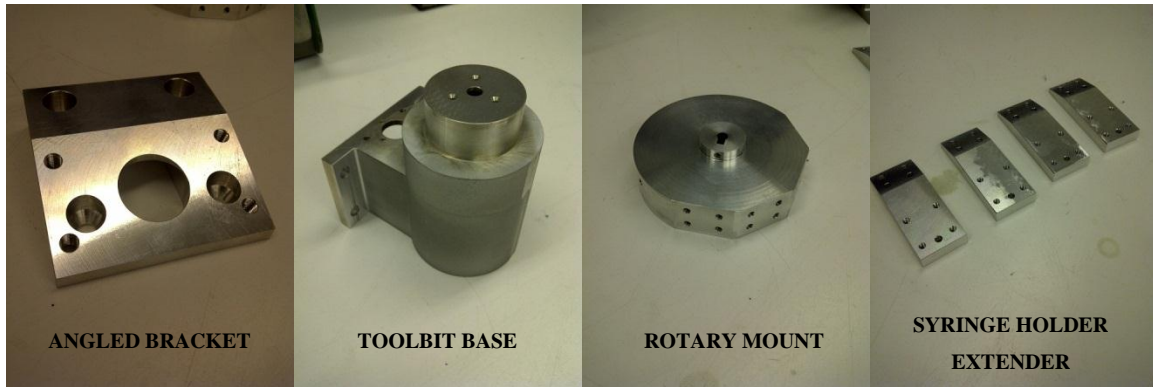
Fabricated Toolbit Parts Using Aluminum
